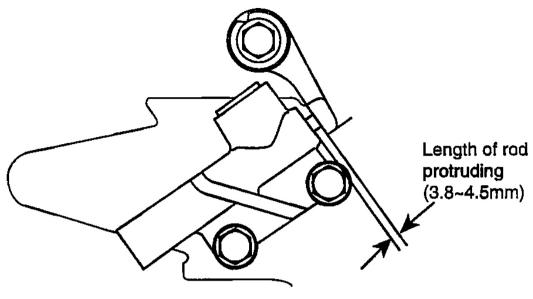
Measuring The Amount Of Rod Protruding From Auto Tensioner Courtesy of KIA MOTORS AMERICA, INC.
